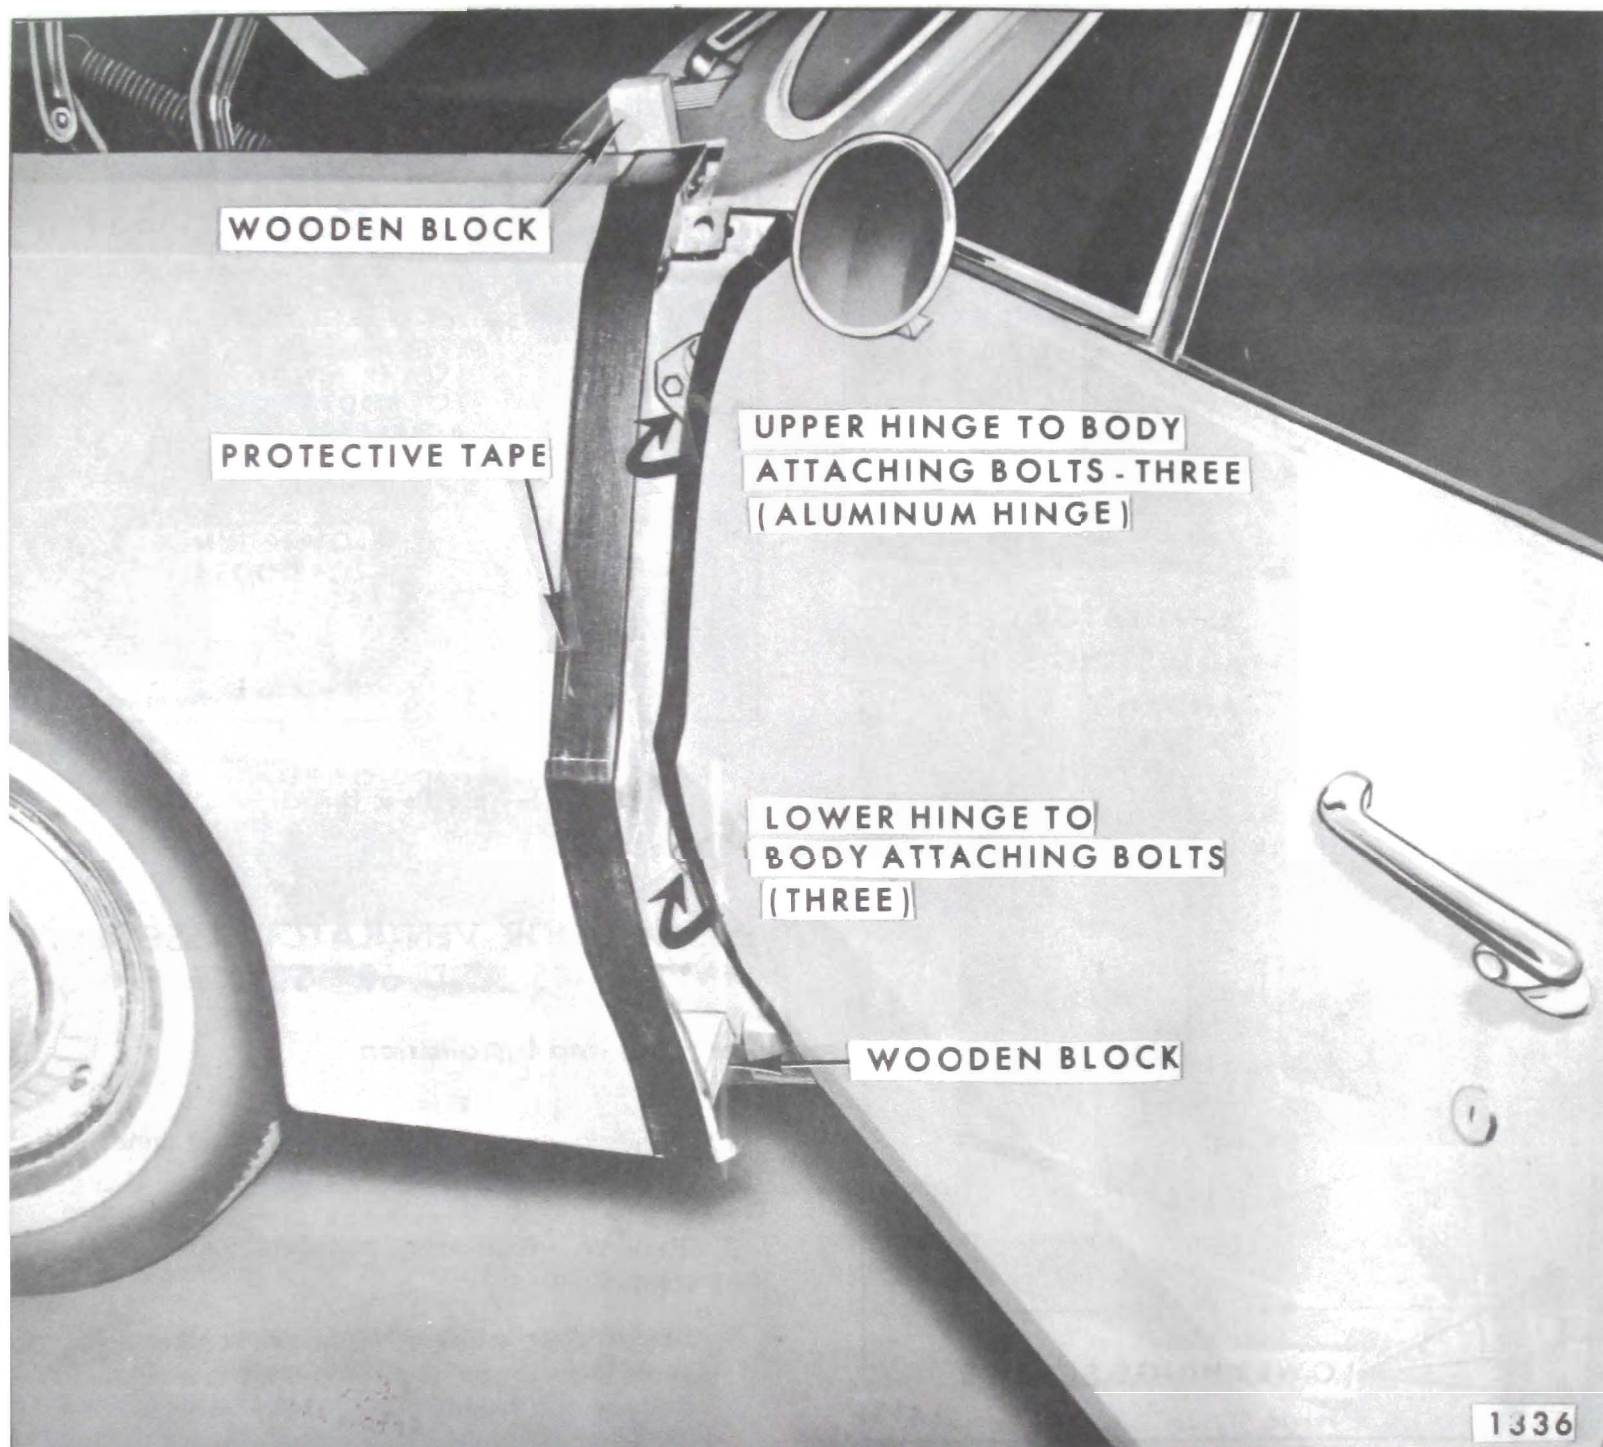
Front Door Hinge Attachment - "A" Styles
